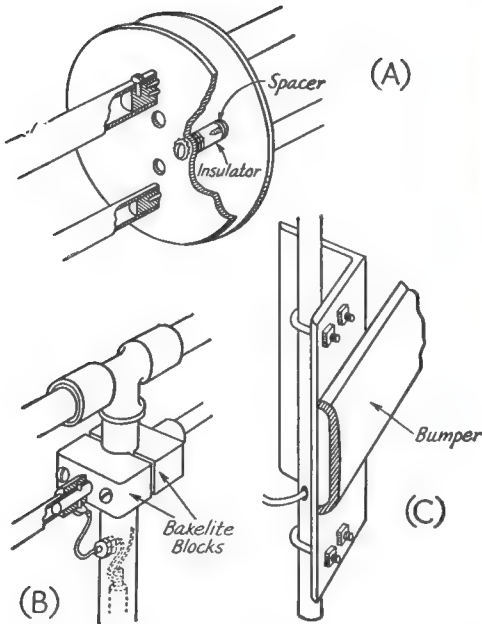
Detail drawings of the various assemblies used in the halo installation. A is a cutaway view of the end-loading capacitor assembly. B shows the method of attaching the coaxial feedline and insulating the center of the fed section of the dipole. The method of attaching the mast to the rear bumper is shown at C. The angle plate is welded to the bumper assembly at three points.
